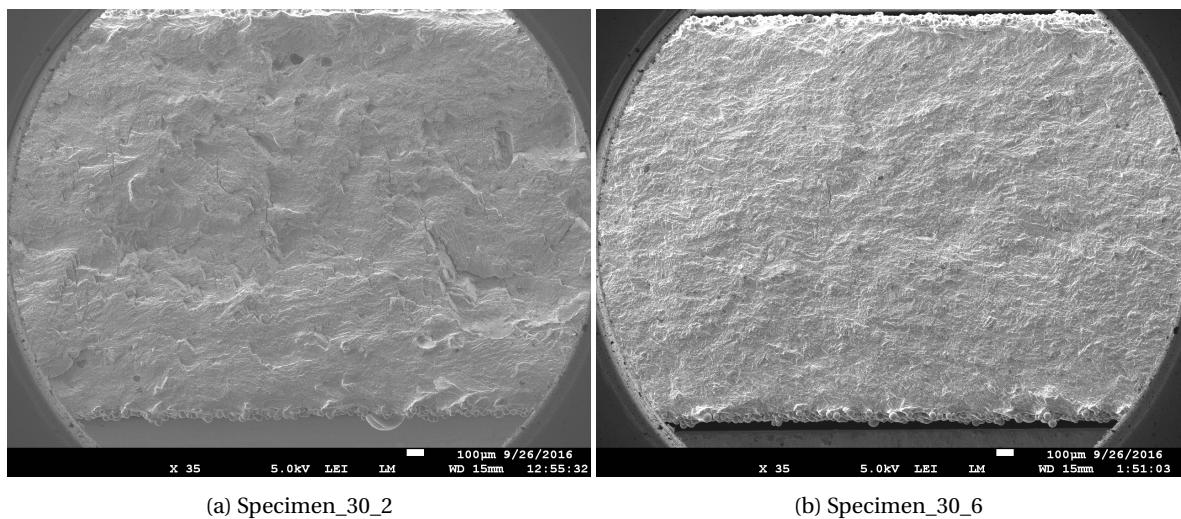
Fracture surface - 30 degrees build direction
